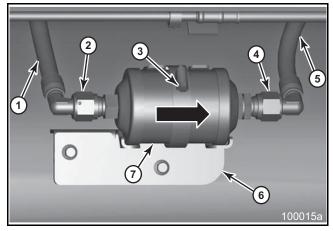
Fuel Fill Line at Filter Outlet (Typical)
